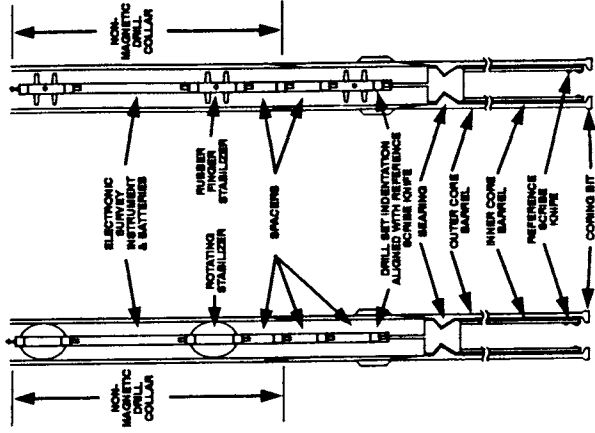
Schematic diagram showing an E.S.I. tool and orienting core barrel assembly with rotating stabilizers and a similar assembly with rubber finger stabilizers.
